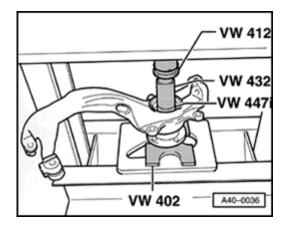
Pressing wheel hub into 75 mm diameter wheel bearing
